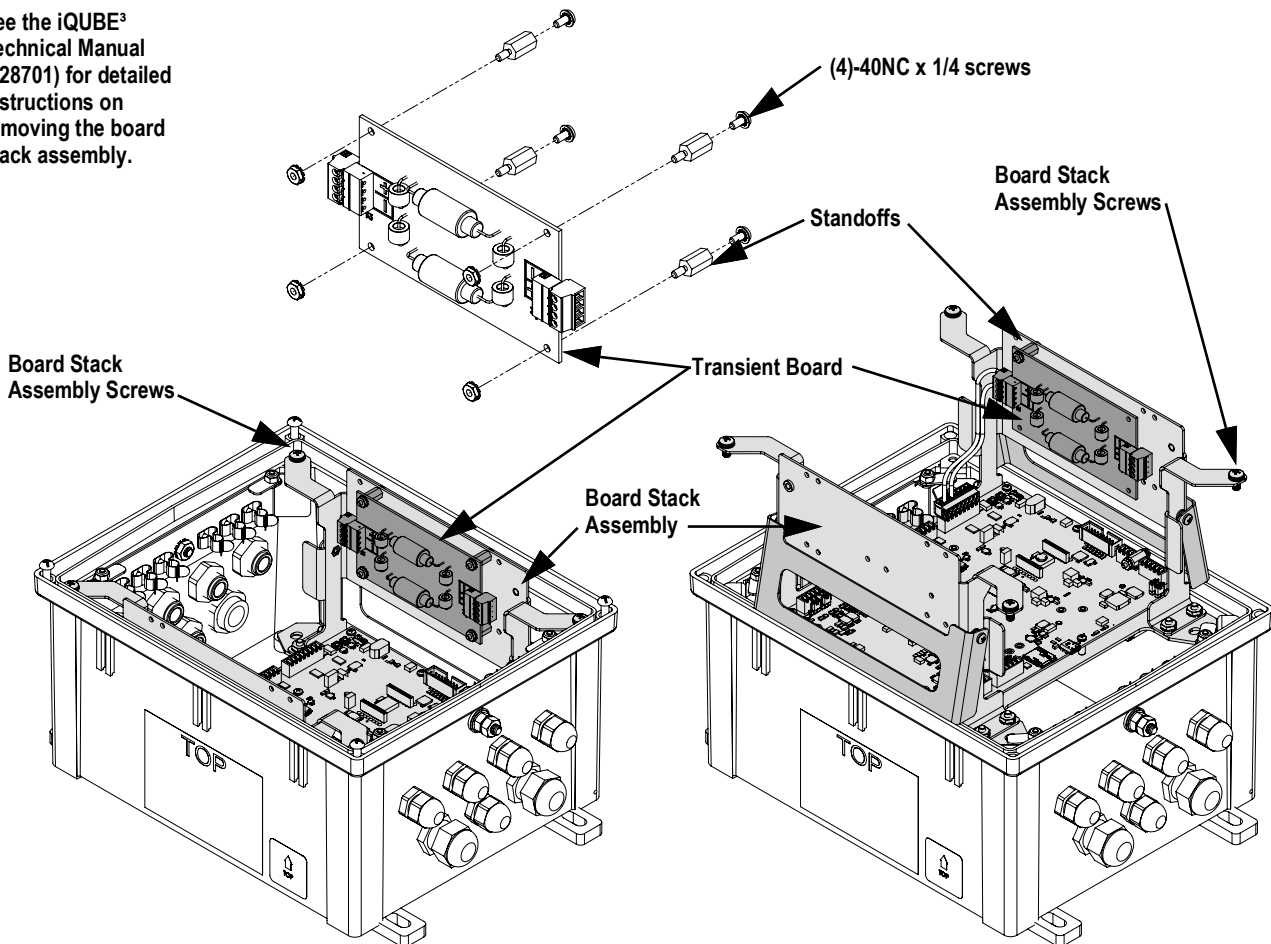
iQUBE³ Board Stack Assembly and Transient Board
